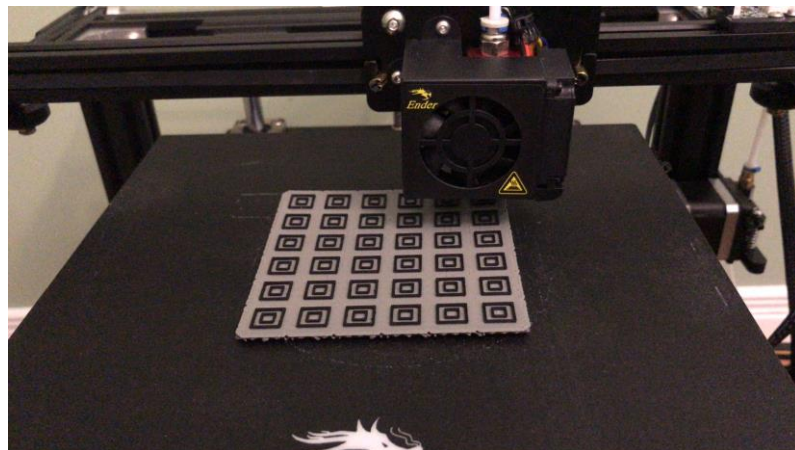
Printing process of Ender 3Pro desktop 3D printer
